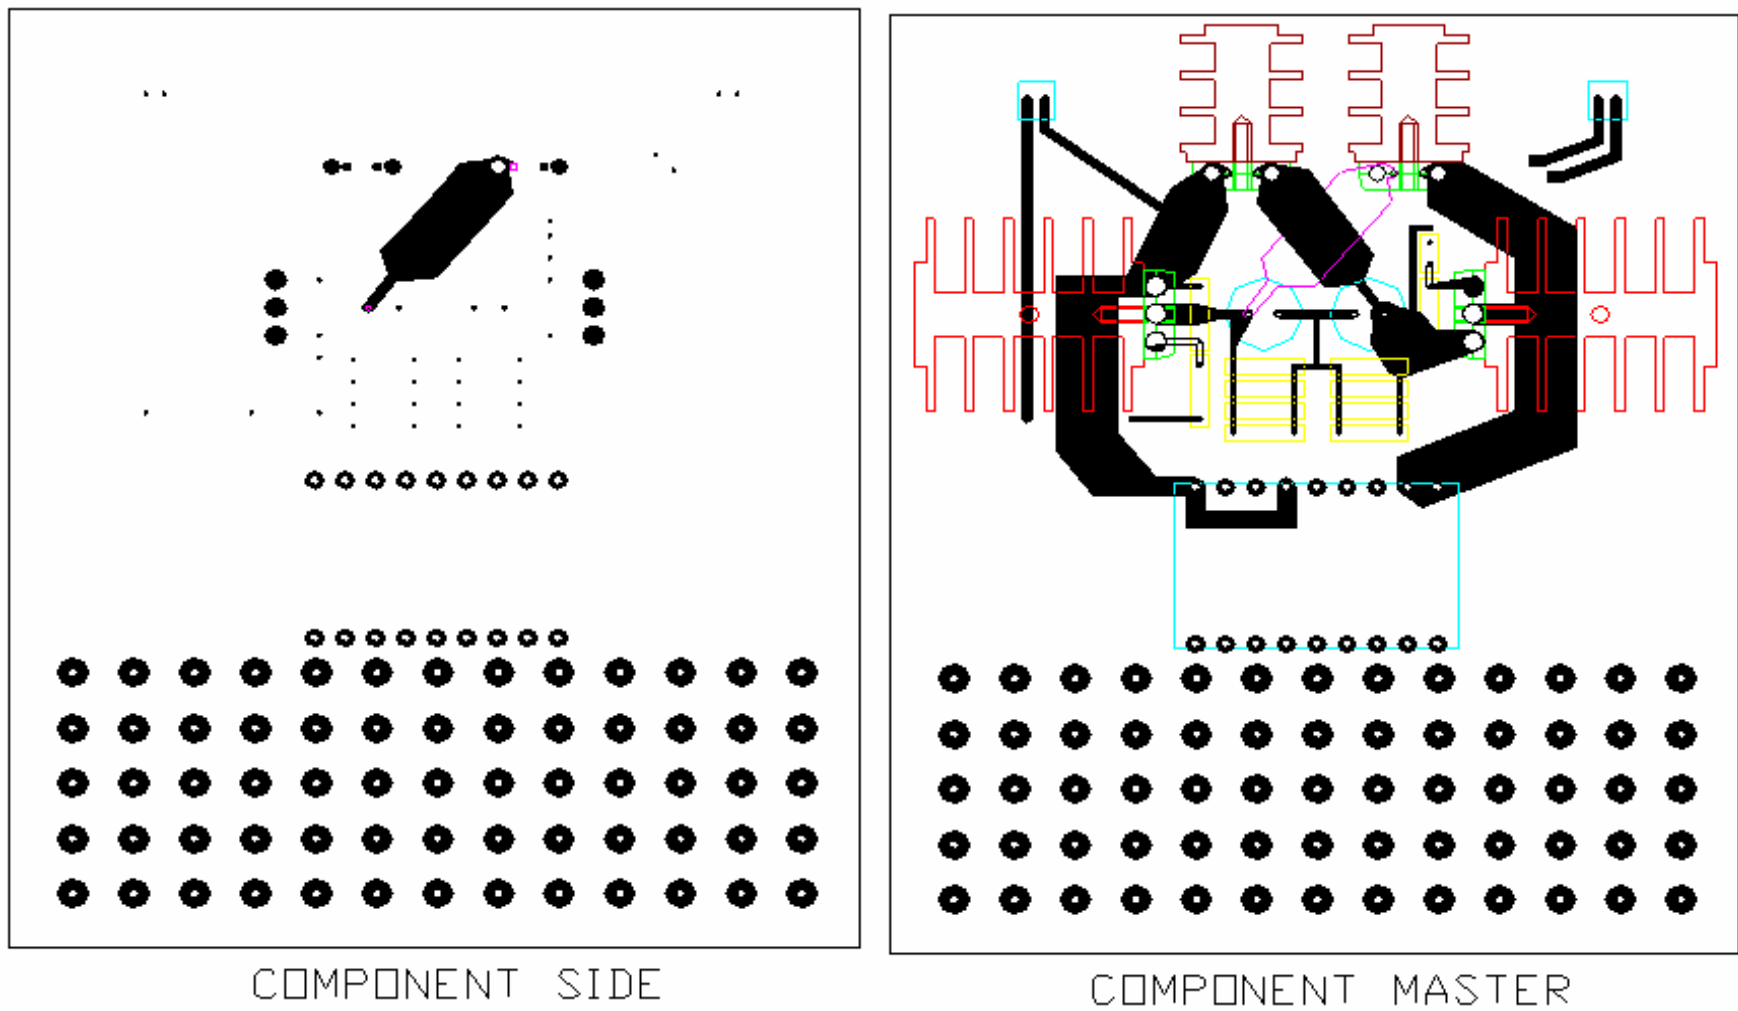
PCB Layout, Component side & Component master
